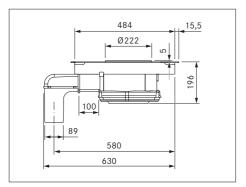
Device dimensions with cable extension (BHA + BLAVH1)
